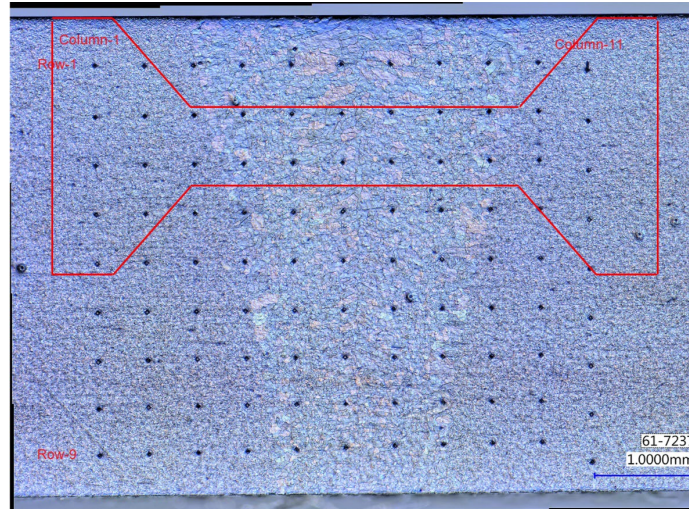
Tensile specimen location and orientation (with respect to the weldment), showing how the weldment “fits” into the tensile specimen gauge.
